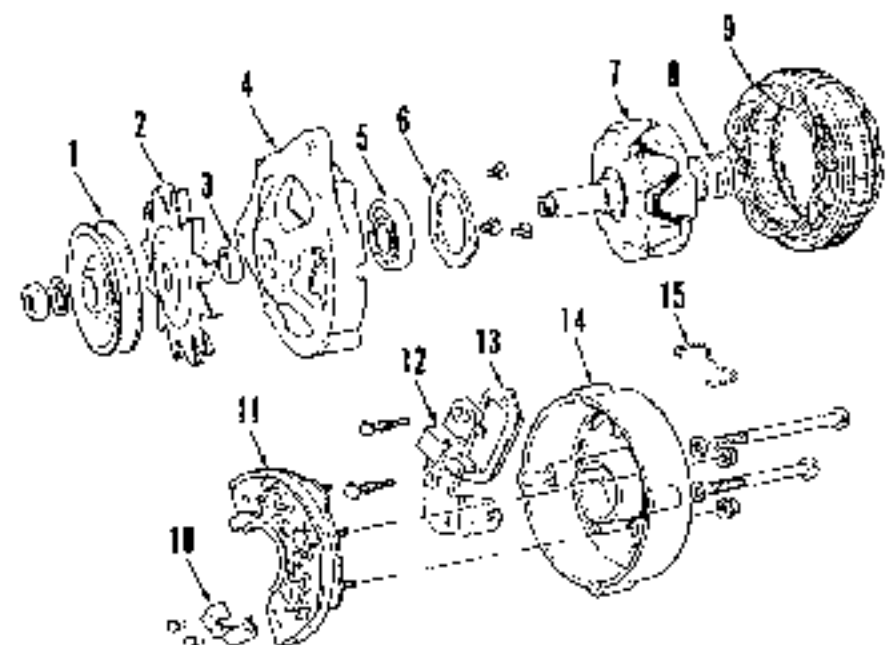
Exploded view of Perkins alternator used on some MF240 and MF250 tractors.
